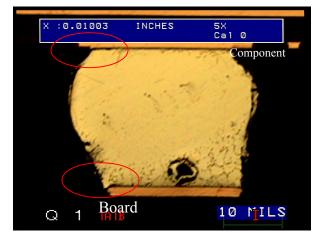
Cross-section of a wbPBGA Solder Joint for Unit 4, Board 4, for Leg 27.
